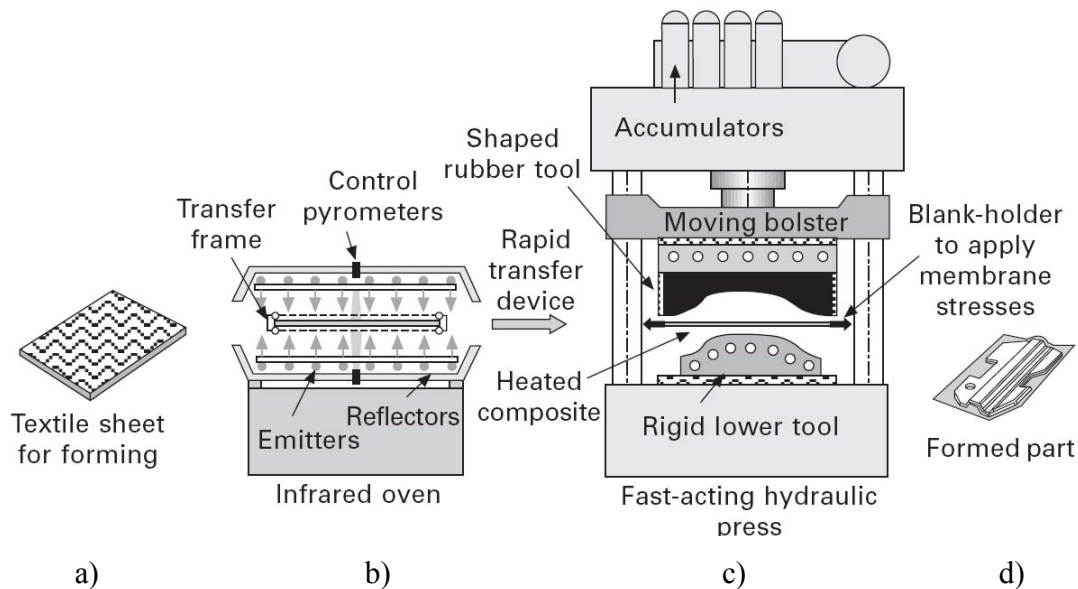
An elastomeric tool forming process [4]. a) pre-consolidated composite sheet to be formed, b) pre-heating of the composite sheet, c) stamp-forming, d) formed part.
